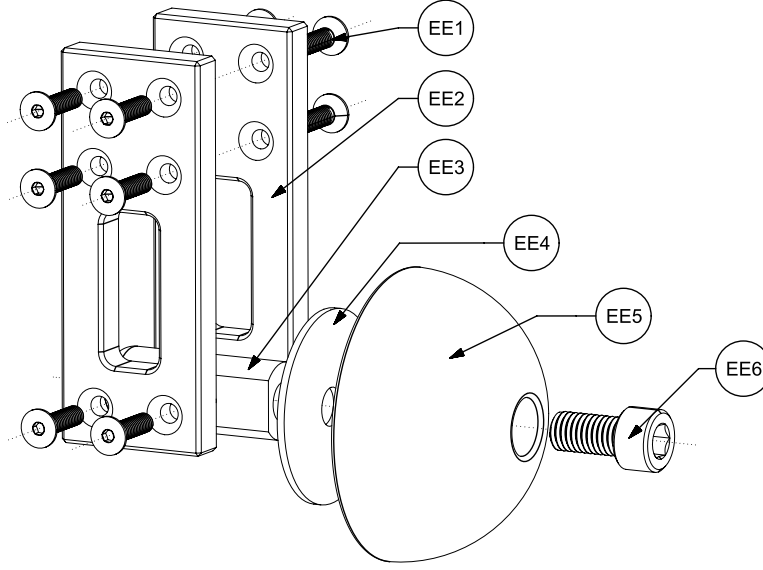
Exploded view of end-effector (EE) with: machine screw (EE1), bracket (EE2), tip-mount (EE3), support-ring (EE4), tip (EE5), and mounting bolt (EE6).
